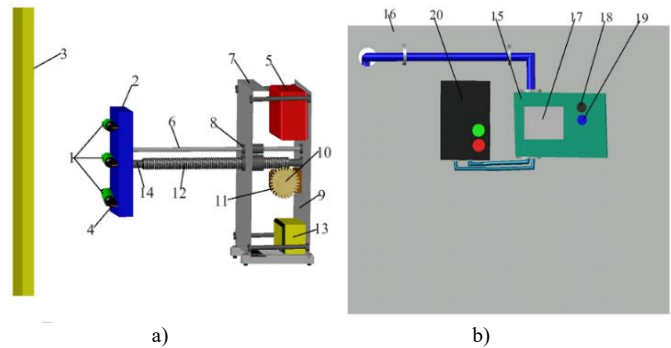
Current protection device: a) placed in the switchgear panel; b) gearmotor control unit.
